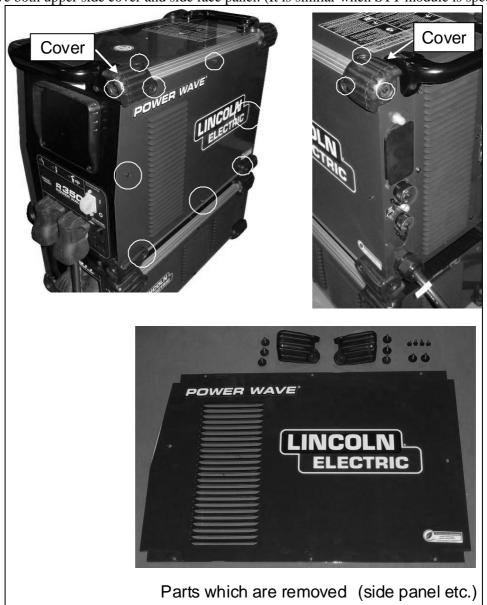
(c) Connection of welding power supply Power Wave R350 (3/4)
